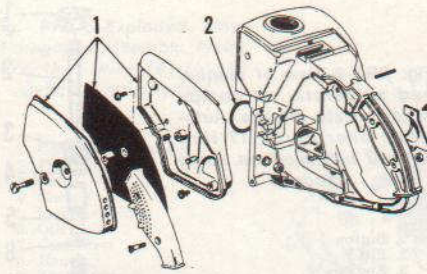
Exploded view of fuel tank, air box and rear handle typical of early models. Carburetor and reed valve are attached to the handle casting and casting is sealed to crankcase by "O" ring (2). Several variations of the air intake and filter (1) have been used.
